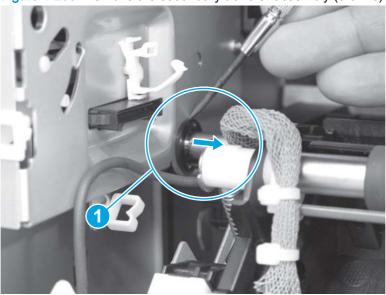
Remove the secondary transfer assembly (7 of 10)
